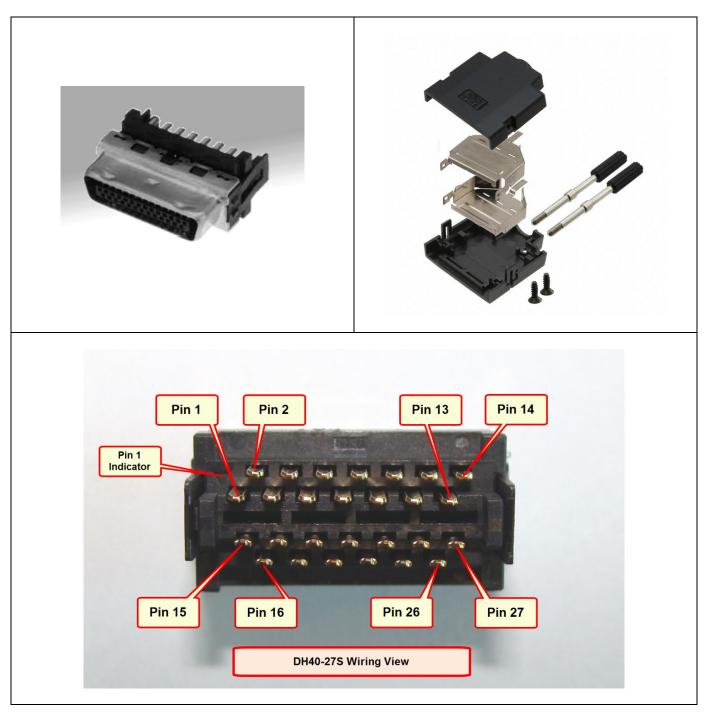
OR-YXCC-H270000 Custom Wiring Kit
